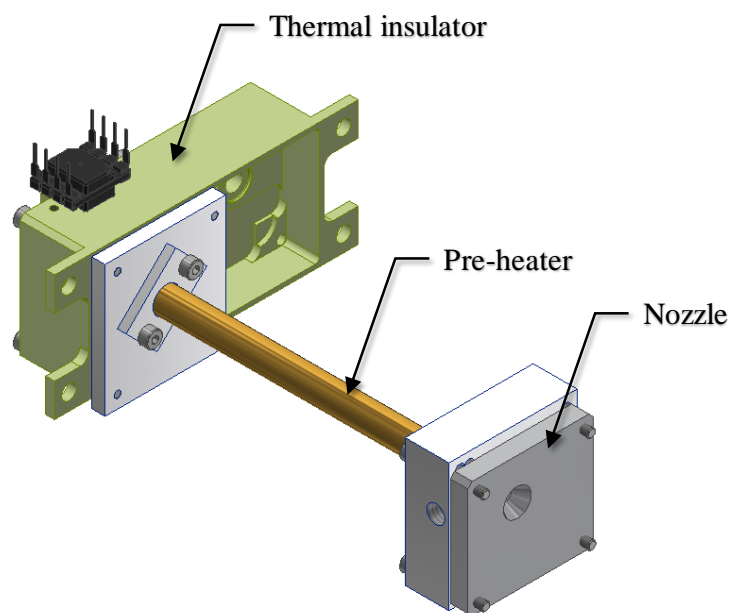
Schematic of the thruster-head which consists of the thermal insulator, the pre-heater, and the nozzle. The nozzle was made of aluminum with a throat diameter of 2.6 mm and a expansion ratio of 13.1. Each component was sealed with o-ring.
